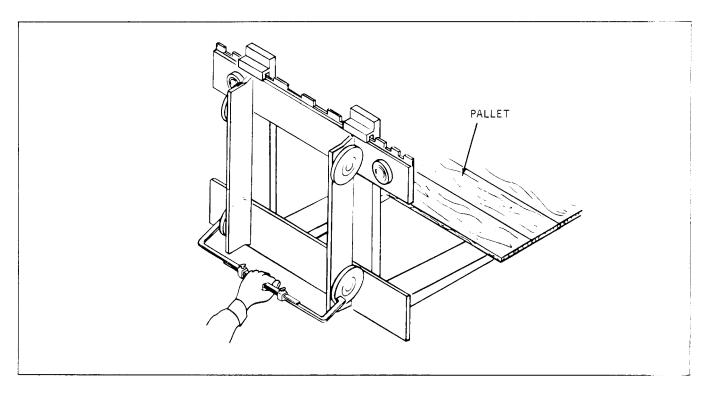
Spanning Lower Rollers (Four Roller Carriage)
